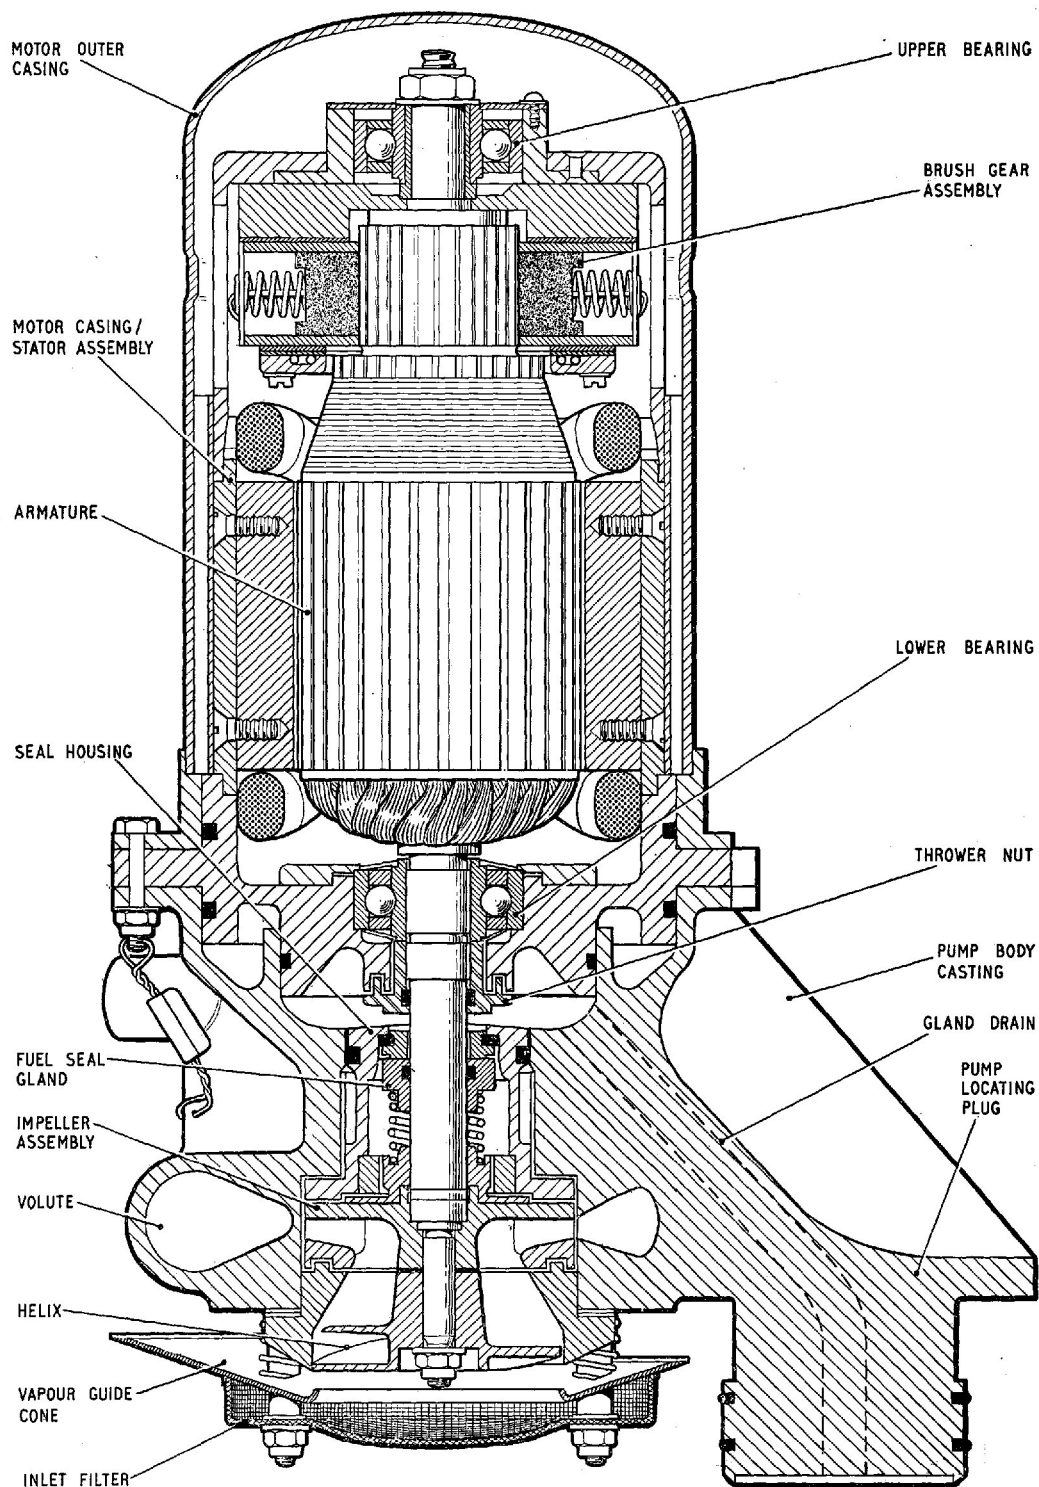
Sectional arrangement of typical SPE.1302 pump
